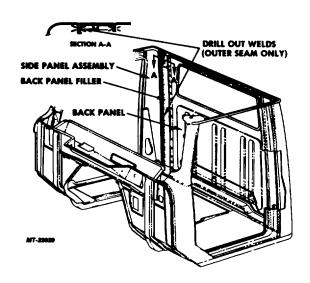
Side Panel to Back Panel Spot Welds (Right Corner 90" Wide Cab Shown)
